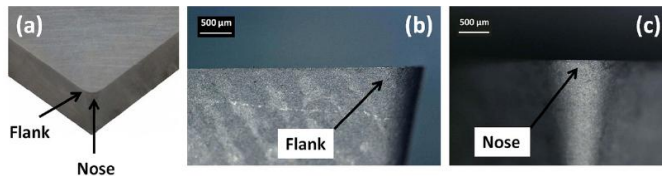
Views of the tool cutting edge. (a) Isometric view, (b) flank face and (c) nose.
